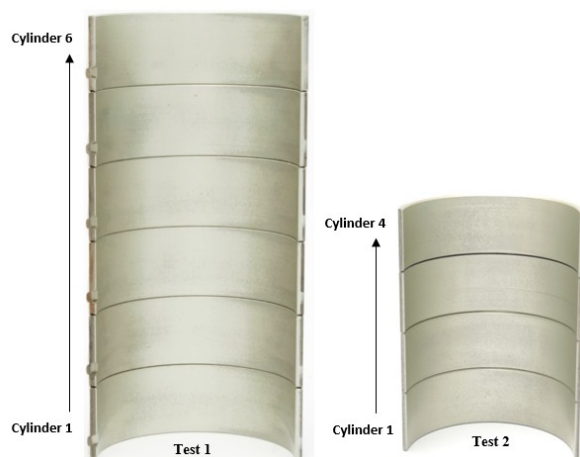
Developed Al-Mn-Mg alloy engine parts after testing. Diesel engine after 900-hour thermal shock (test 1) and Flex-fuel engine after 300-hour durability (test 2).
